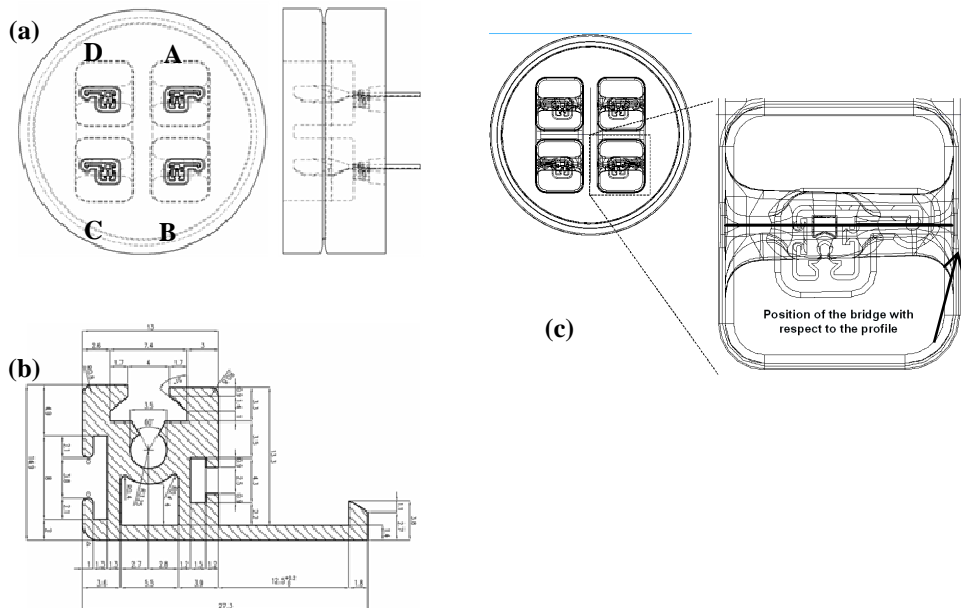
(a) The die used in the experimental design with the profile labelling, (b) shape and dimensions of the profile and (c) position of the bridge with respect to the profile geometry for the seam weld formation.
